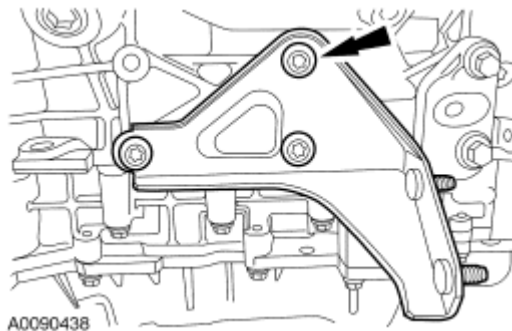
Locating Halfshaft Support Bracket & Bolts
